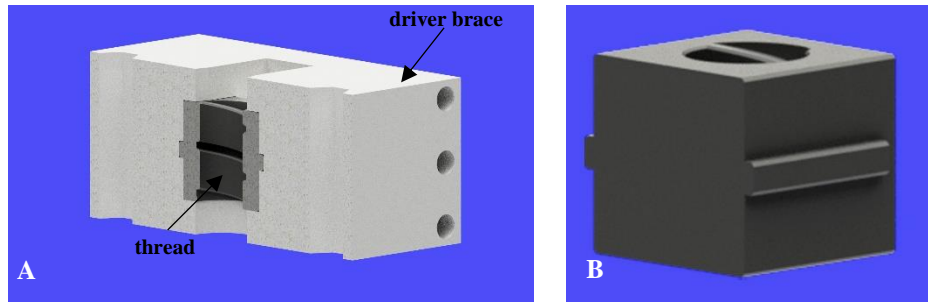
(A) Section view: Driver brace with Thread (B) Thread
